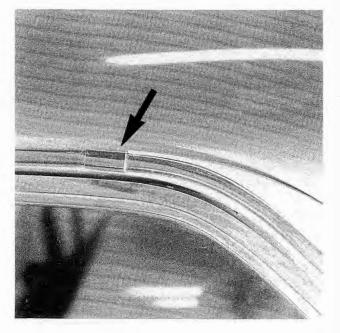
Clip on rain gutter molding (arrow) to be moved back.
